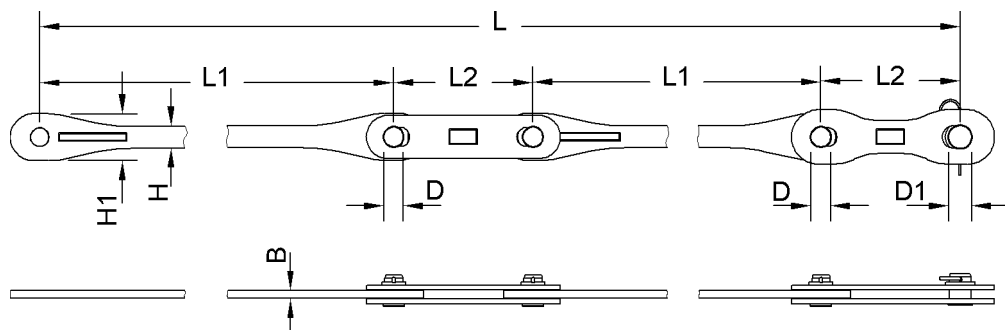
Dimensions of reducing piece pendant strap 40 ft
